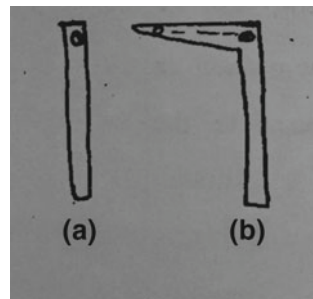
Threading of the needle of the feed-off-the-arm machine
